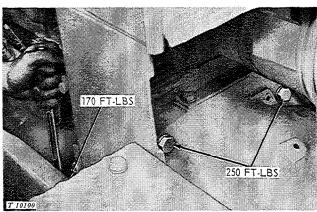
Torquing Engine Attaching Cap Screws
